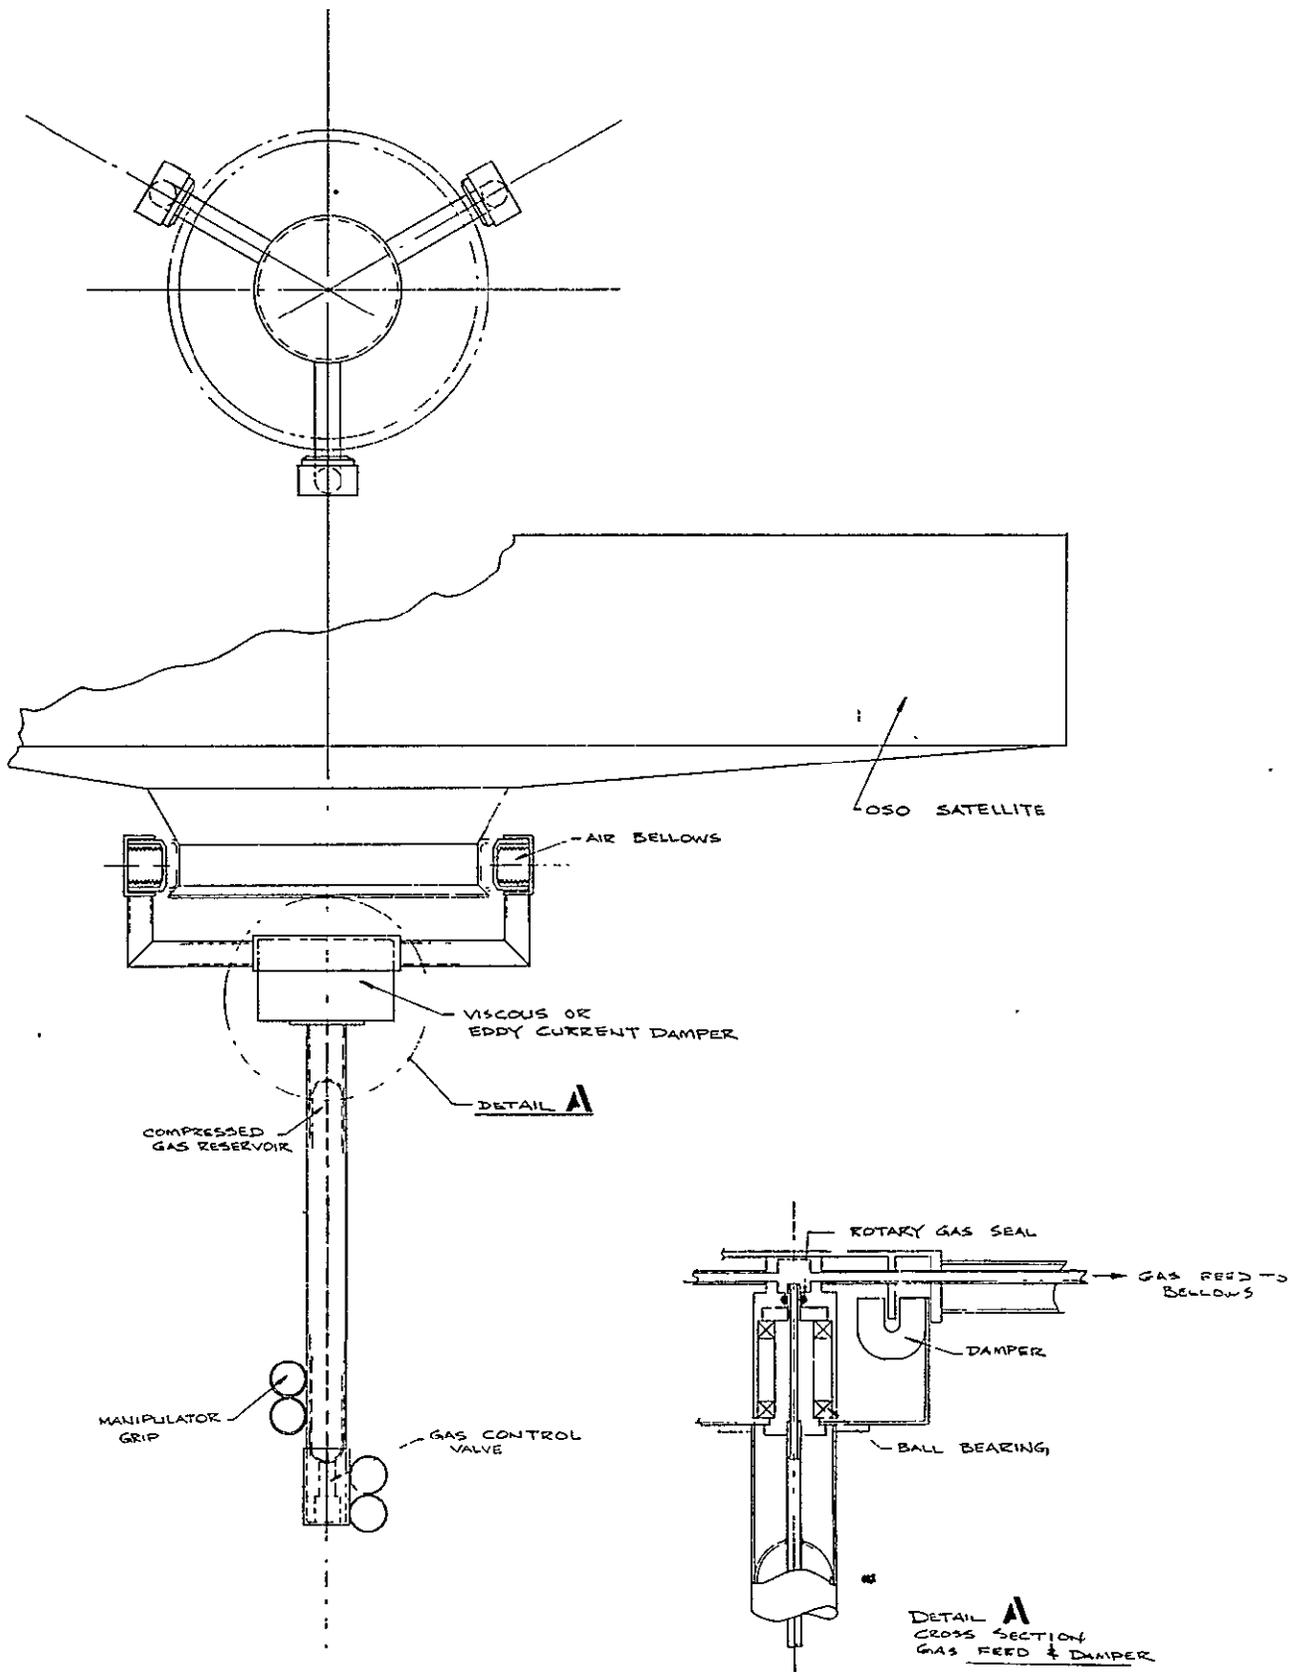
OSO-D Fixture Nonrotating Air Bellows Attachment Head
